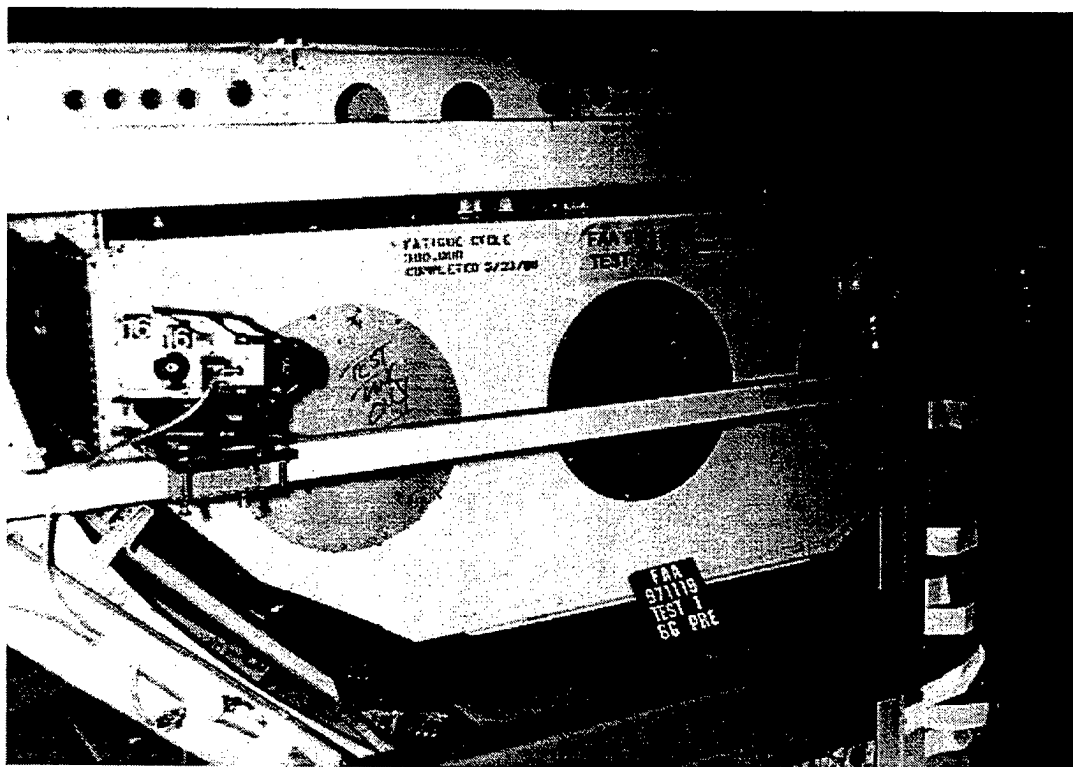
PRETEST AUXILIARY FUEL TANK FRONT OVERALL VIEW
